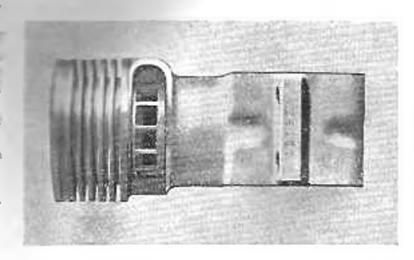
Shows modification to a late 1949 Redhead .29 crankcase and cylinder liner.
